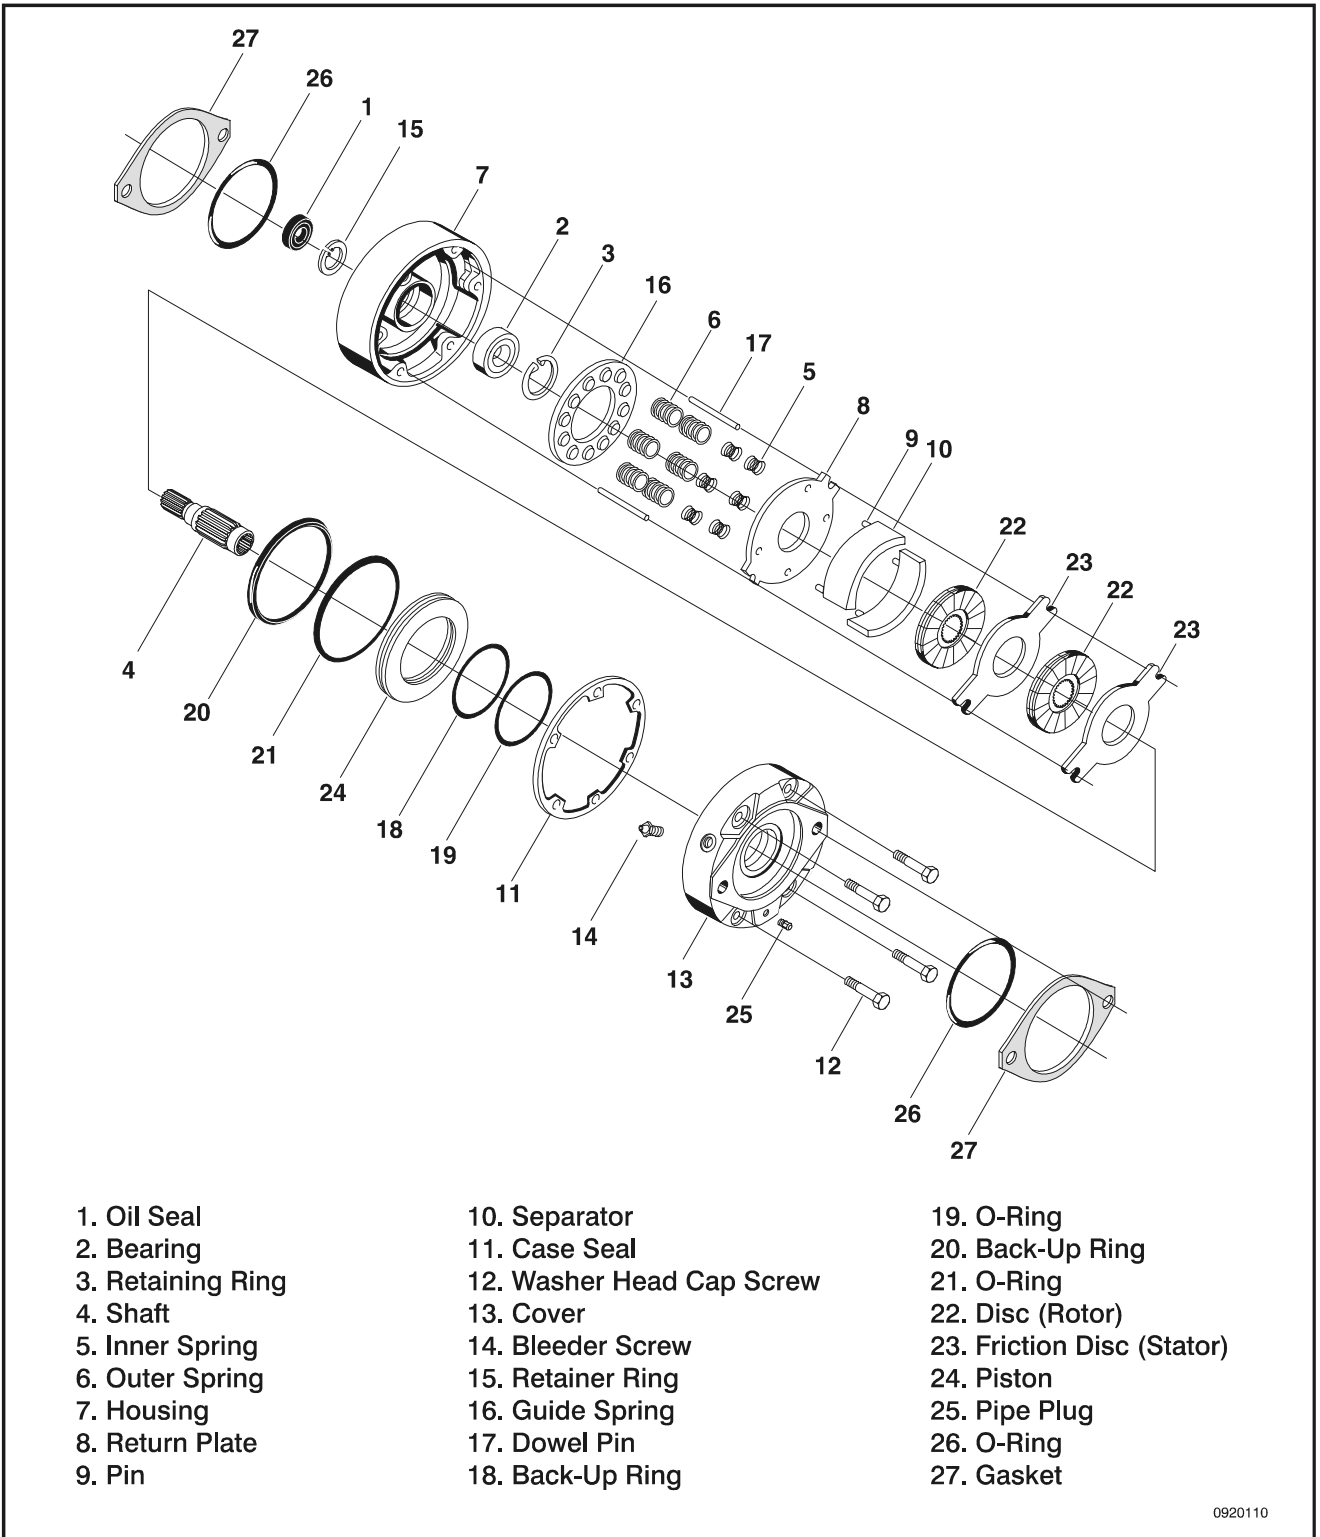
Drive Brake, Mico - Machines Built from 1992 to Present
